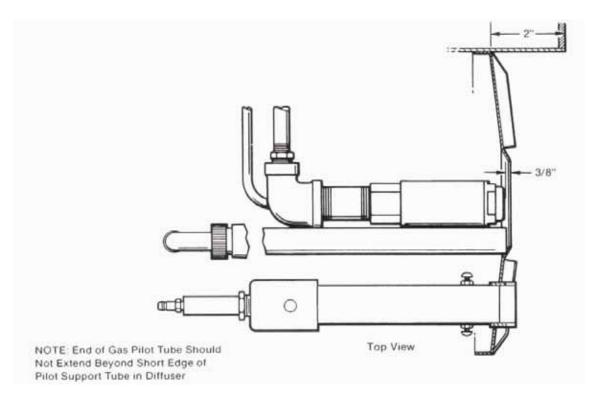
MM, MMG, ME, MEG 34-63 Drawer Assembly Dimensions
